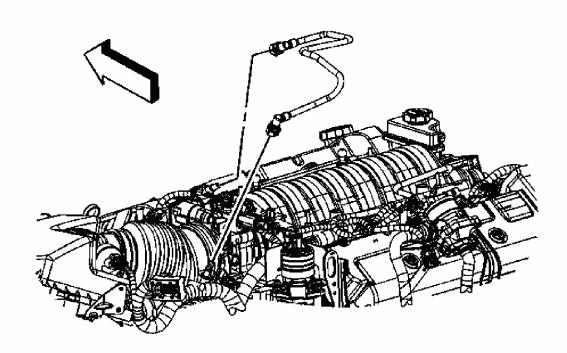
Identifying PCV Fresh Air Tube Courtesy of GENERAL MOTORS CORP.
